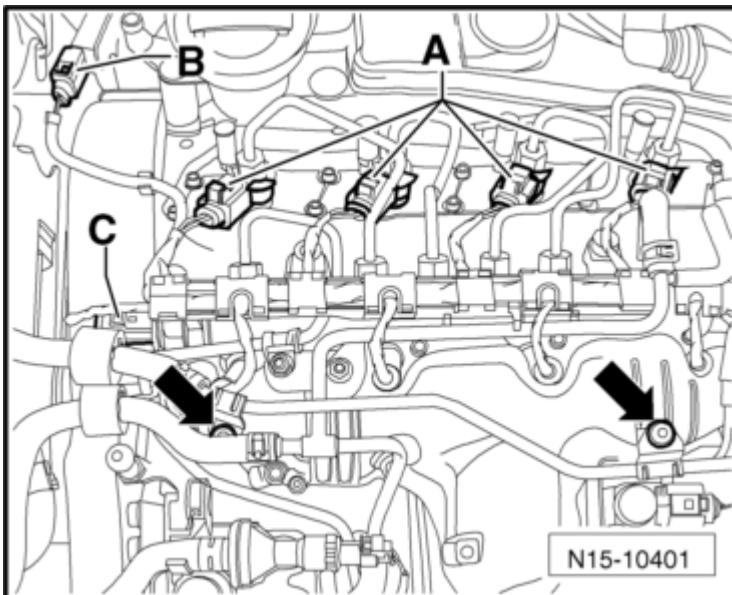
Identifying Fuel Injectors -A-, Exhaust Pressure Sensor 1 -G450- -B- And Fuel Pressure Sensor -G247- -C-
